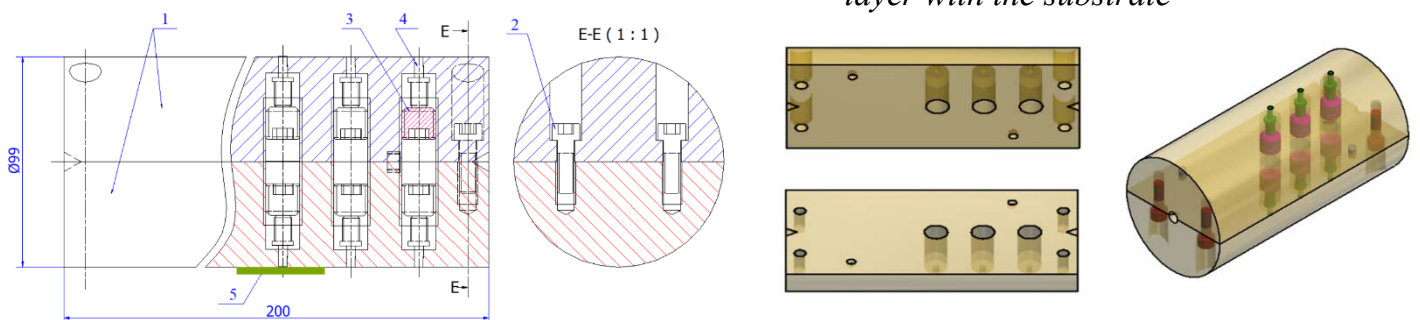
Durable checking pin joints the welding layer with the substrate
